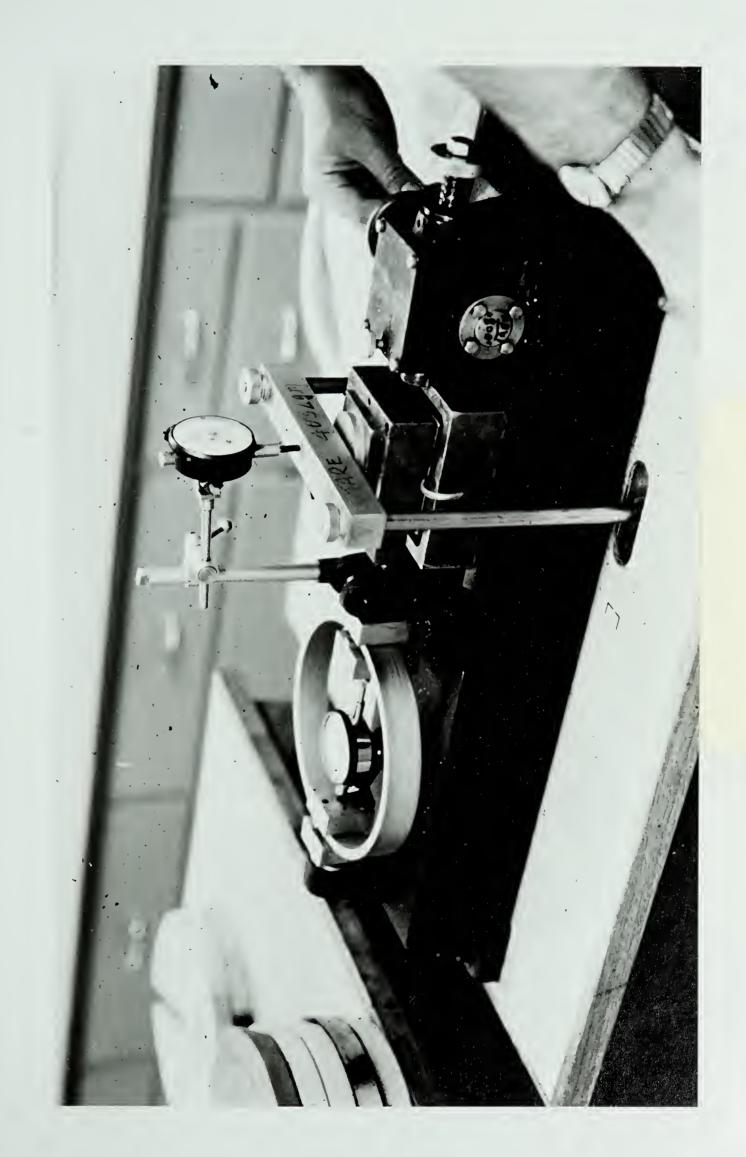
GRINDING SECTION ON LAPPING WHEEL
